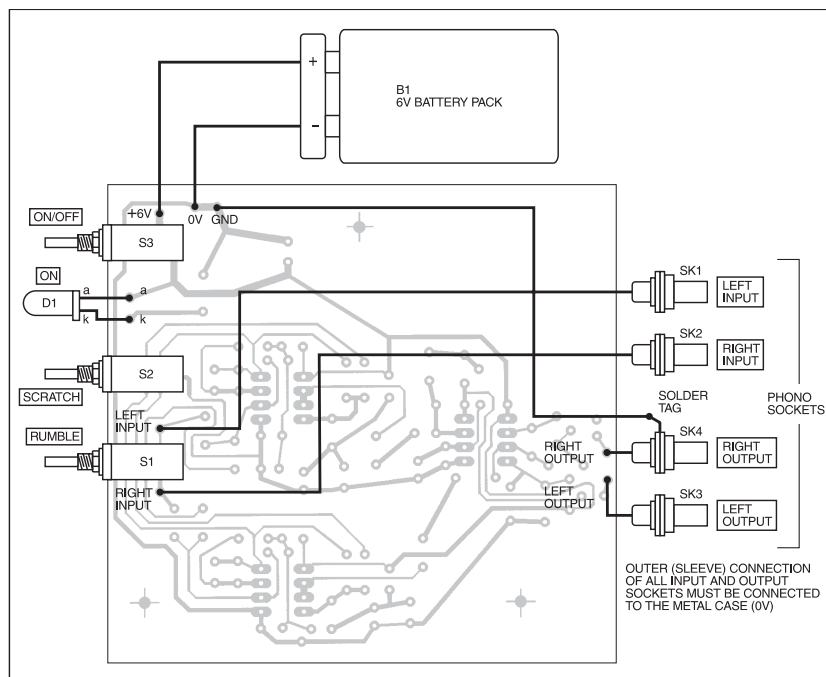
Interwiring details from the printed circuit board to the rear panel mounted input and output phono sockets.
